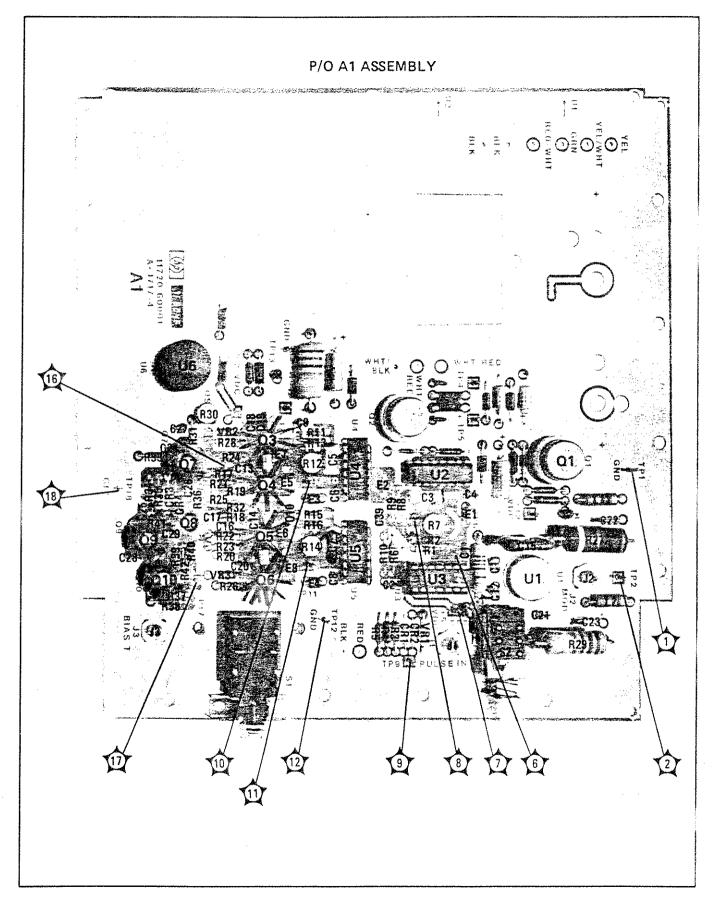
P/O A1 Pulse Driver Board Assembly Component Locations
